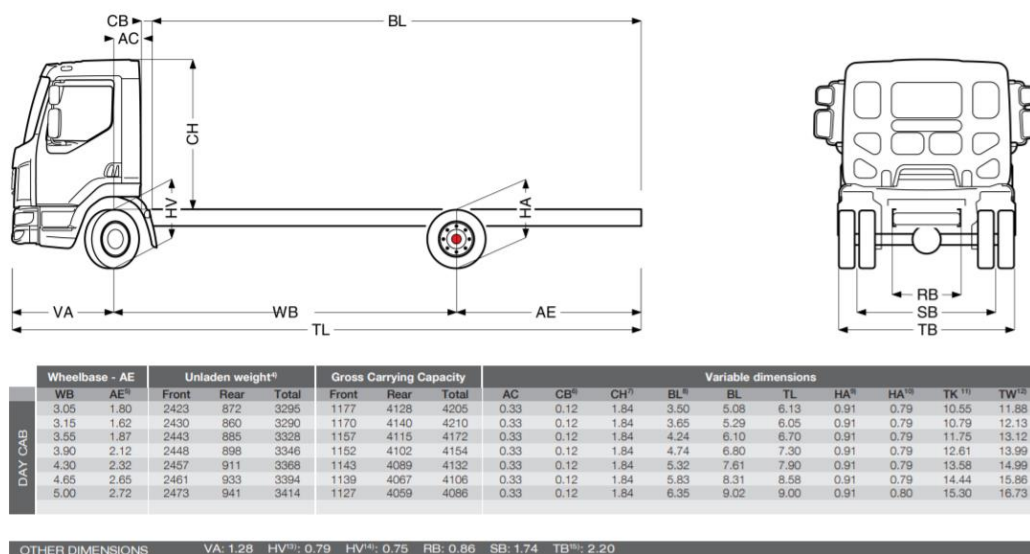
Example truck technical drawing with dimensions<sup>15</sup>
